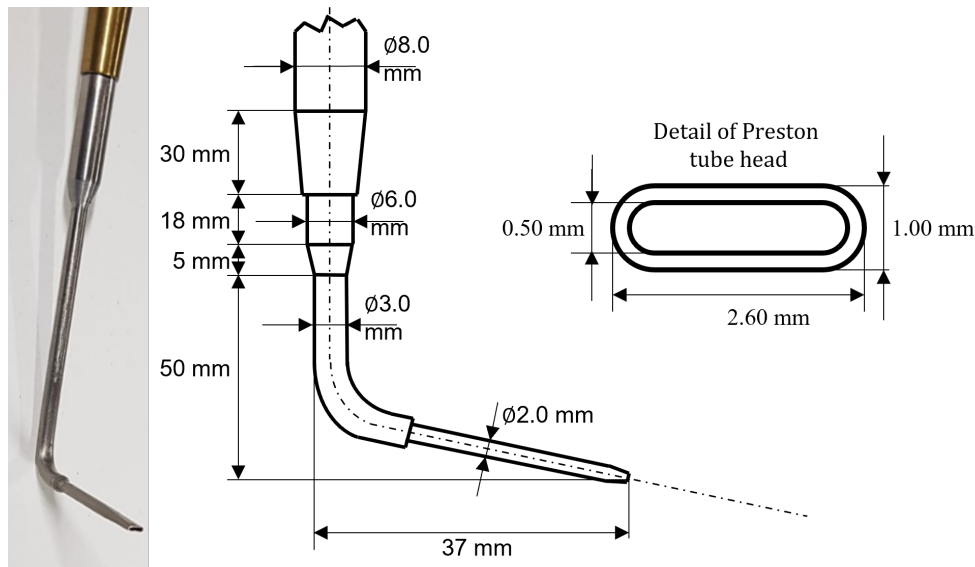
Preston boundary layer probe geometry and dimensions.
